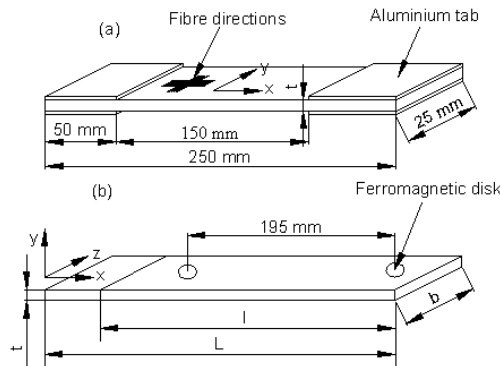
Schematics drawing of specimens (a) tensile test specimen (b) vibration specimen
